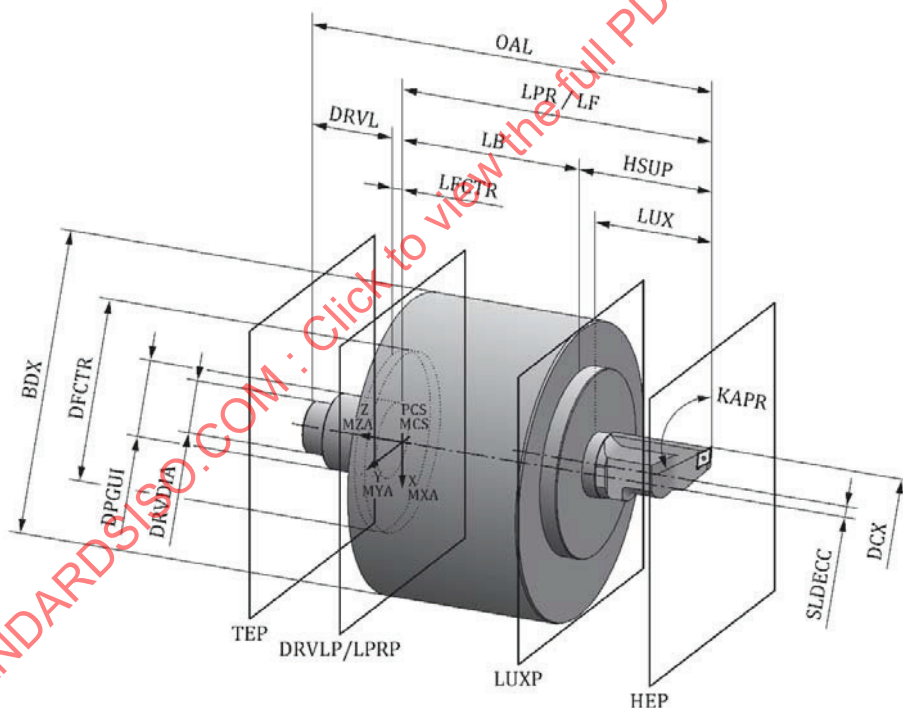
Assembled feed out tool with one rotary slide for internal machining
